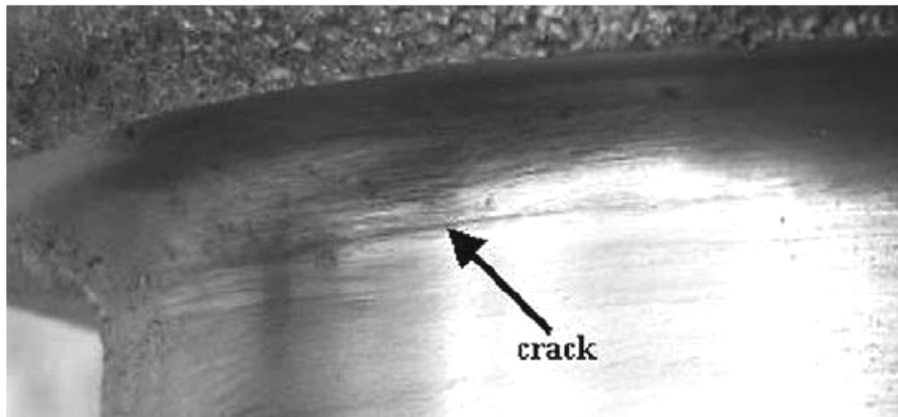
Circumferential crack in failed crankshaft from the study by Asi [2006].
